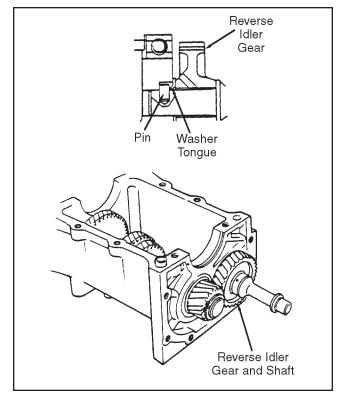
H-34. Reverse Idler Gear and Shaft Installation
